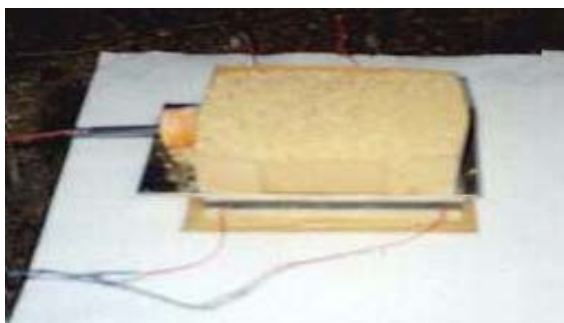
Lateral angle of the experimental assembly used for the process of plating through explosion
